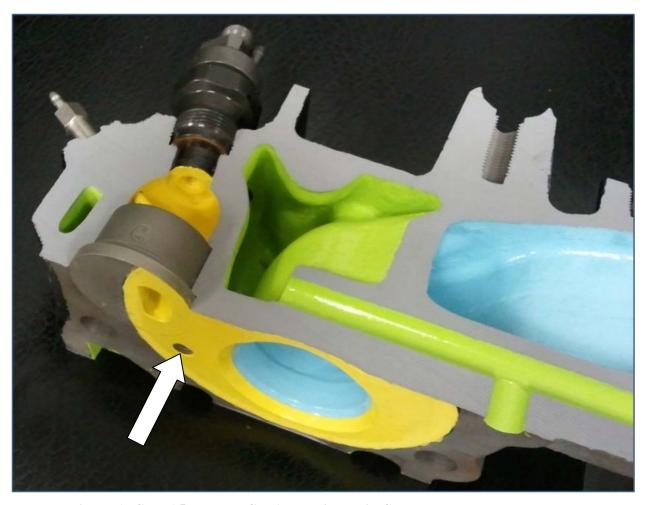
GEP 6.5LT Head Cut Away with Main Chamber Pressure Transducer Location Indicated
